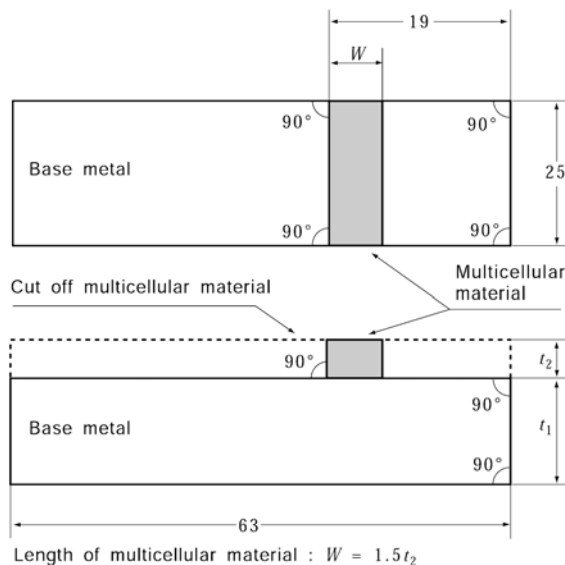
Size and Dimensions of Shearing Test Specimens (unit: mm)
